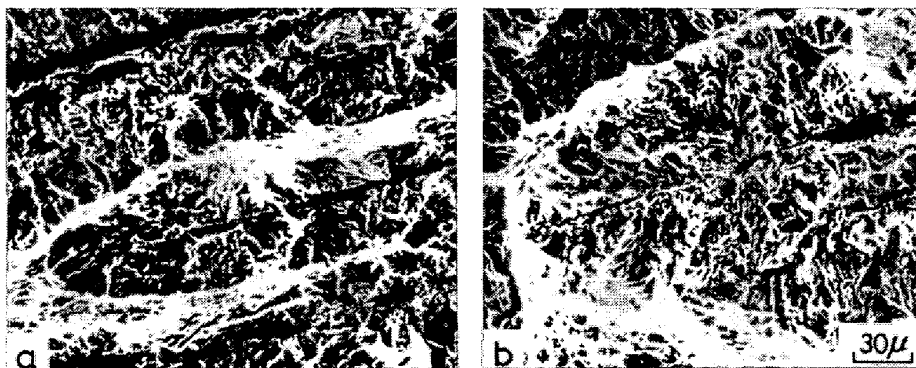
Scanning electron micrographs of fractured surface in through-thickness direction after HIC test. Hydrogen induced cracking are observed in vicinity of MnS inclusions. Cracks are bounded by shear fracture caused by tension test in through-thickness direction. (a) : $900^\circ C$ for 4 h and (b) : $900^\circ C$ for 16 h.
